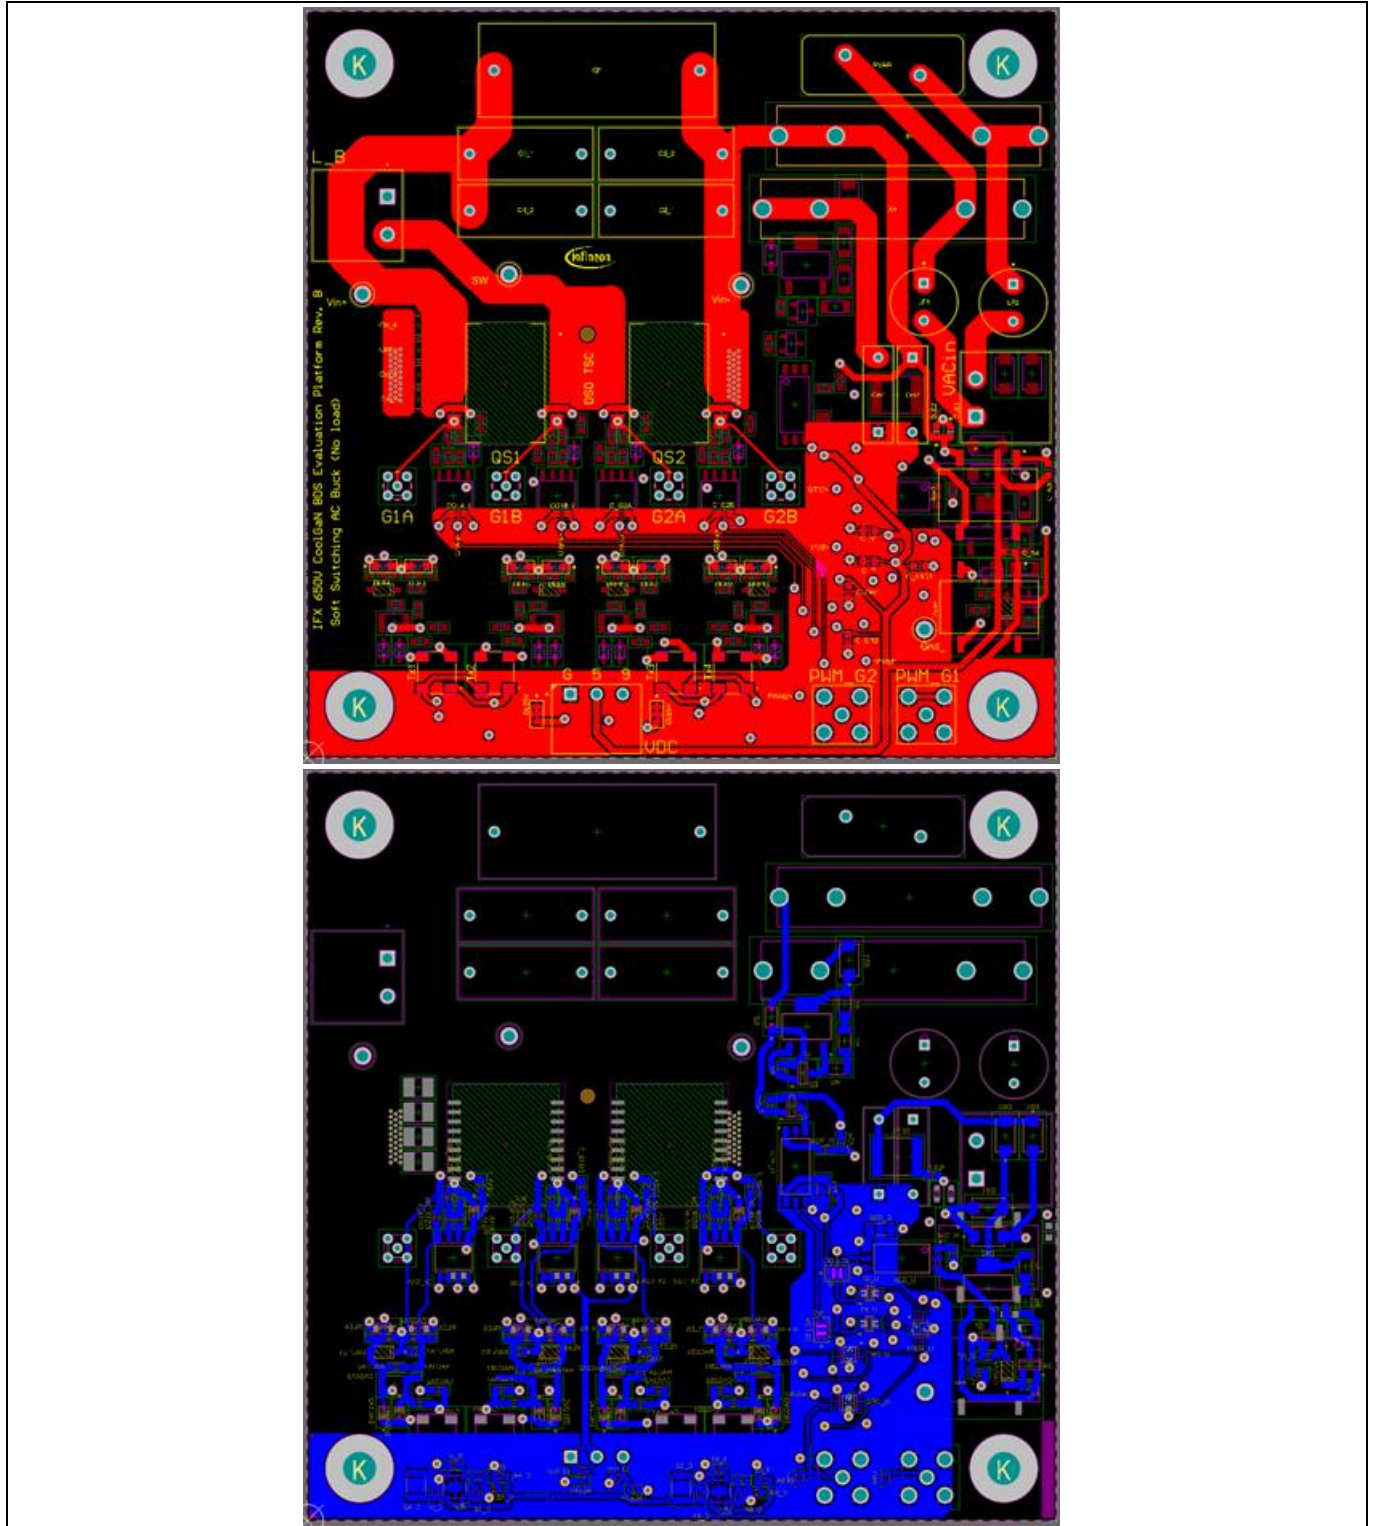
DEMO_AC_ZVS_HVBDS demo board – Top layer (layer 1), bottom layer (layer 4)
